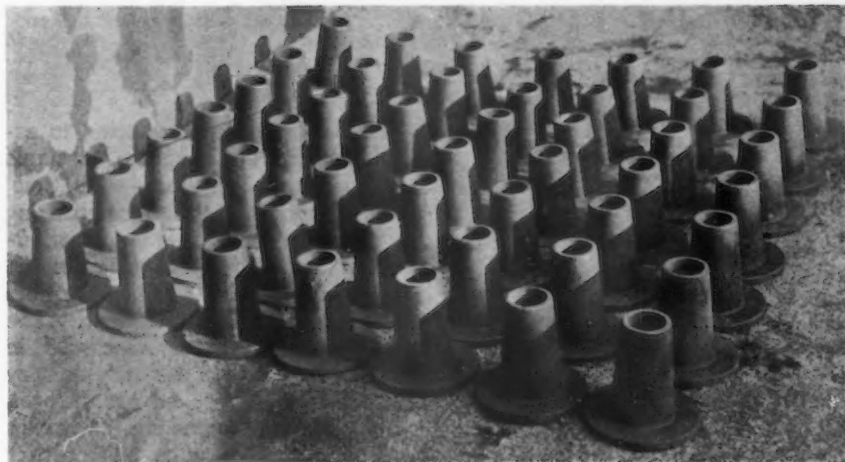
Beryllium-copper bearing sleeve castings for adjustable pitch propellers for airplanes.
